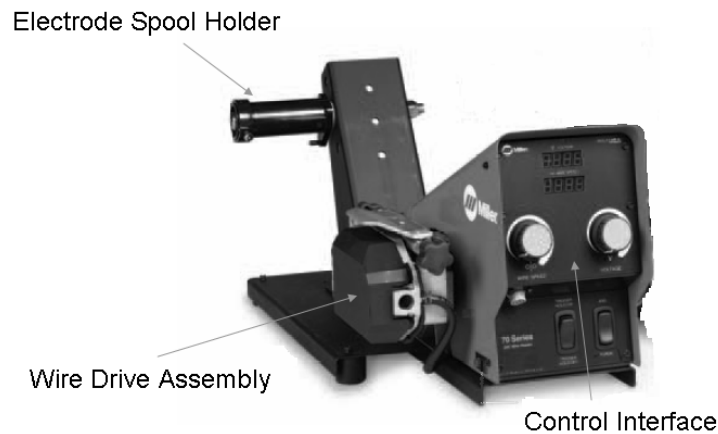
A picture of the as-received wire feeding unit, which is a Miller S-70 model with high-speed motor option [40].
